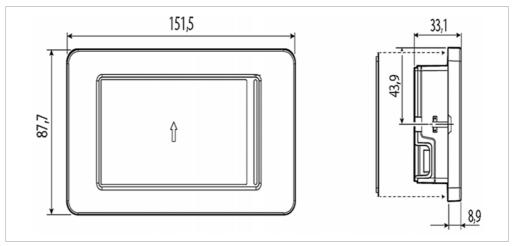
Front and side view ISYteq Touch 4.0 (dimensions in mm)
